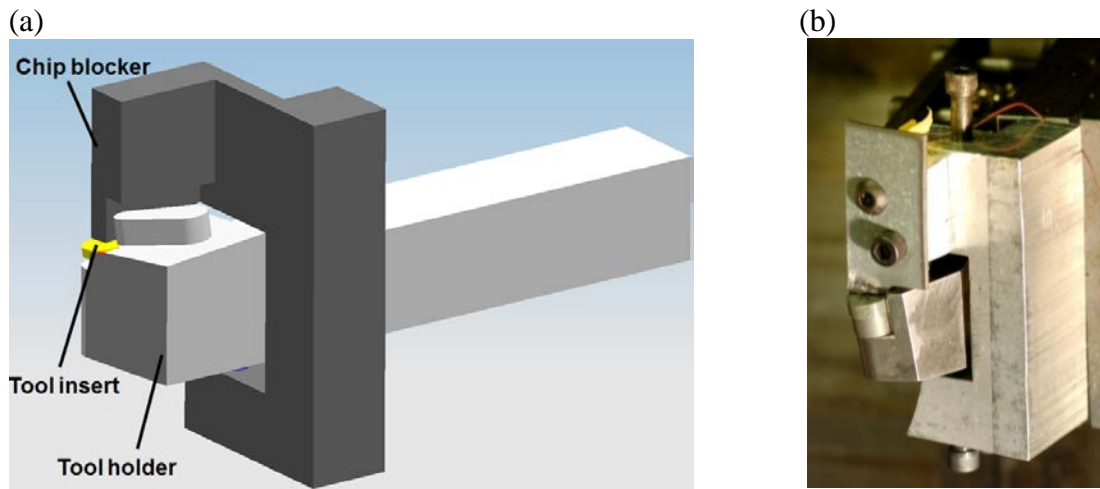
Chip blocker (a) CAD design of chip blocker (b) installed chip blocker
